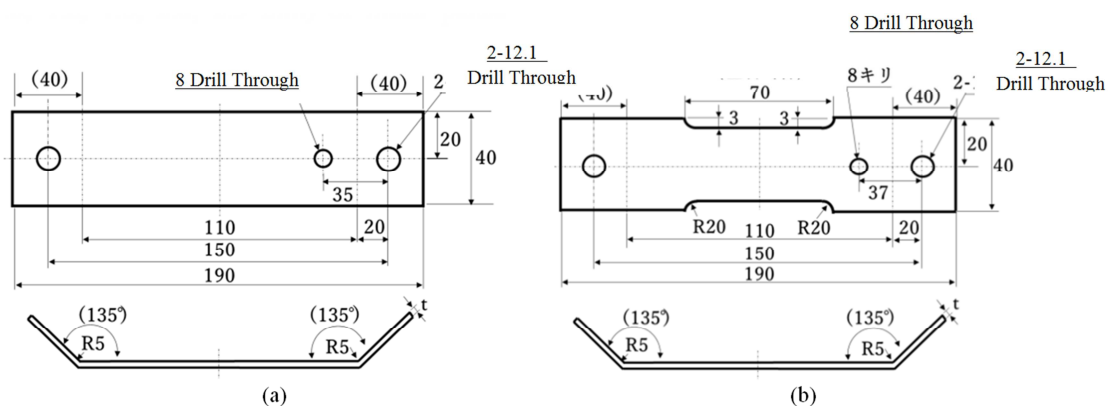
Details of shapes and dimensions of the piezoelectric composite sensor for A type (a) and B type (b).
